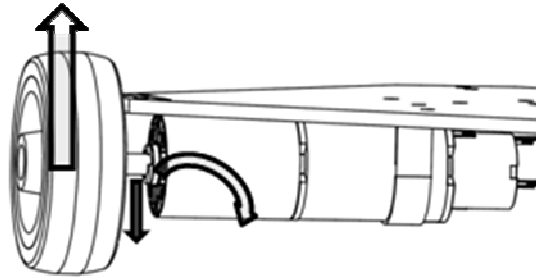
Induction of Damaging Moments on Motor Shaft
